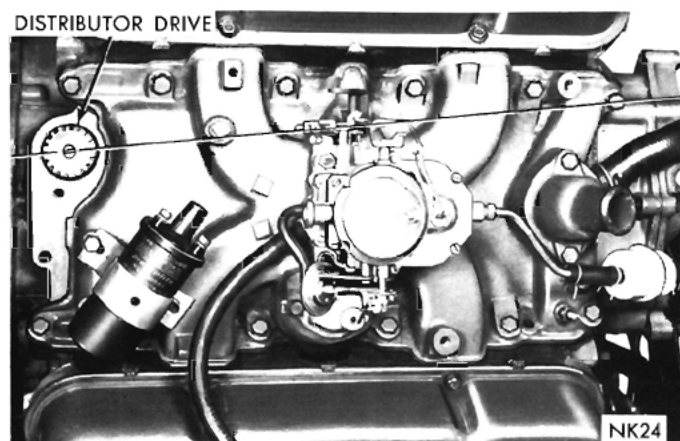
Position of Distributor Drive Shaft (273 & 318 Cu. In.)
